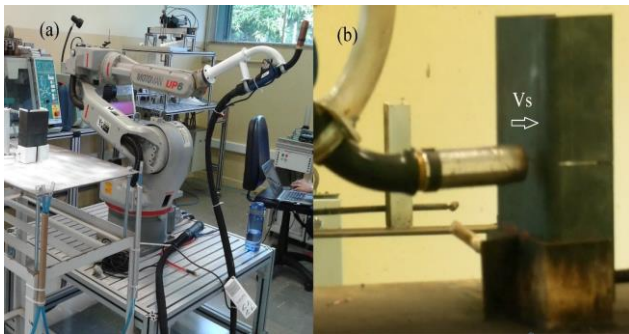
Torch displacement system: (a) robotic arm adaptation; (b) joint positioning and welding direction.
